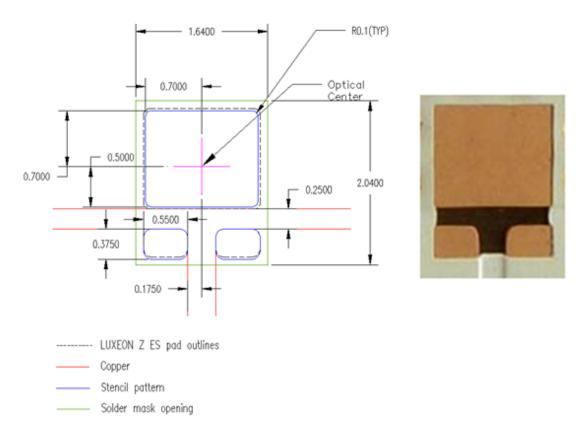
Recommended PCB footprint design for LUXEON Z ES for low component count density (layout design A). Dimensions in mm.
